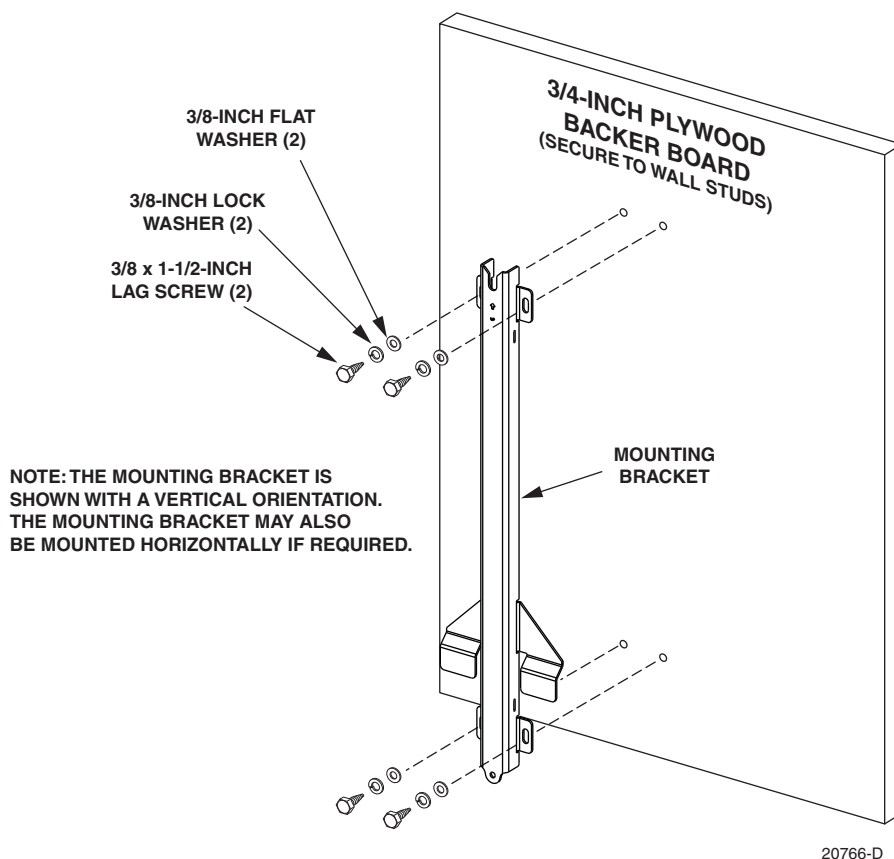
Secure Standard Mounting Bracket To Plywood Backer
